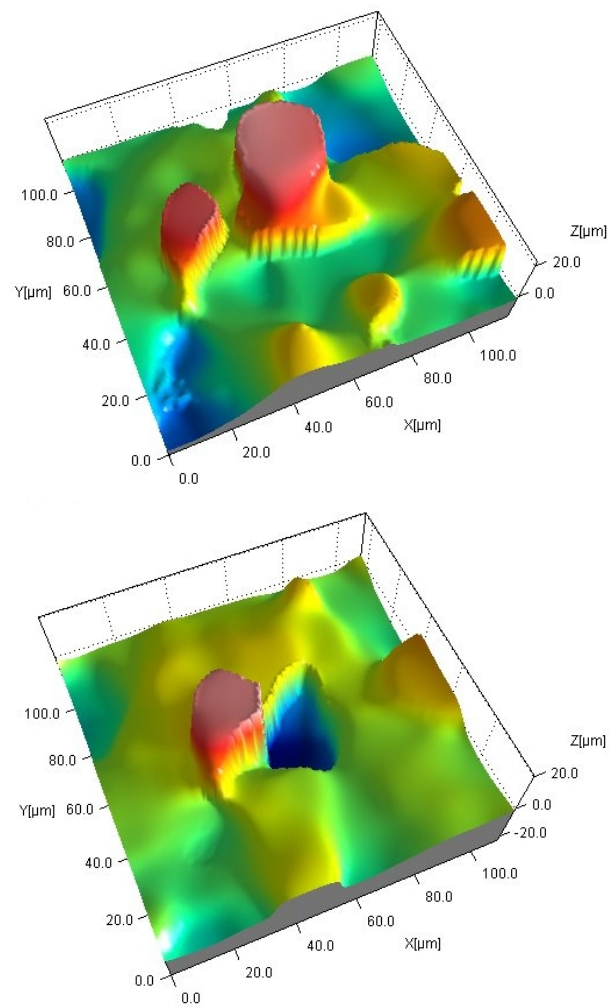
Abrasive grain on the grinding-wheel AS before grinding (top) and after grinding using that wheel (bottom): visible wear due to grain crushing (views obtained from replicas).
